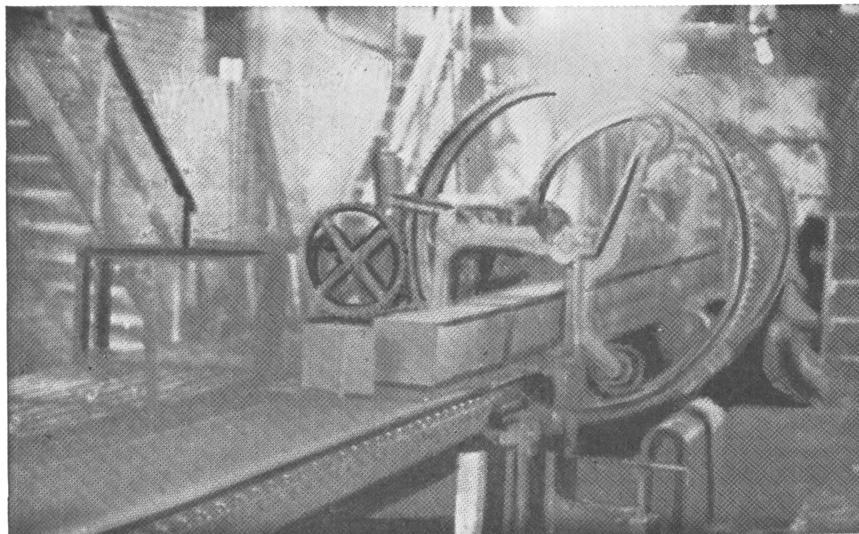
VIEW SHOWING  $6\frac{1}{2}$ - BY 7-INCH EXTRUDED COLUMN BEING CUT TO PROPER LENGTH BY STANDARD BRICK-CUTTING ASSEMBLY.
